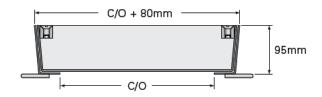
XPAVE 95 Galvanised Steel Dimensions
